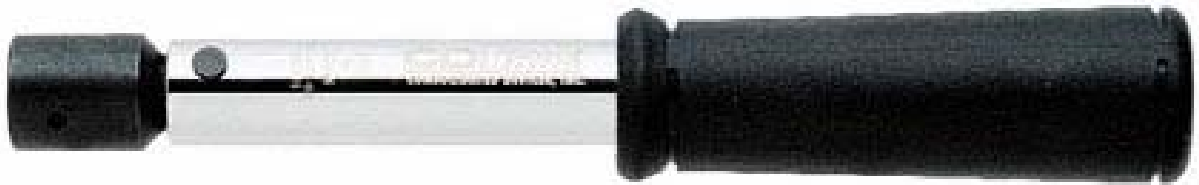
5T-I Pre-Set Torque Wrench (Flexible Assembly Systems Inc.)
